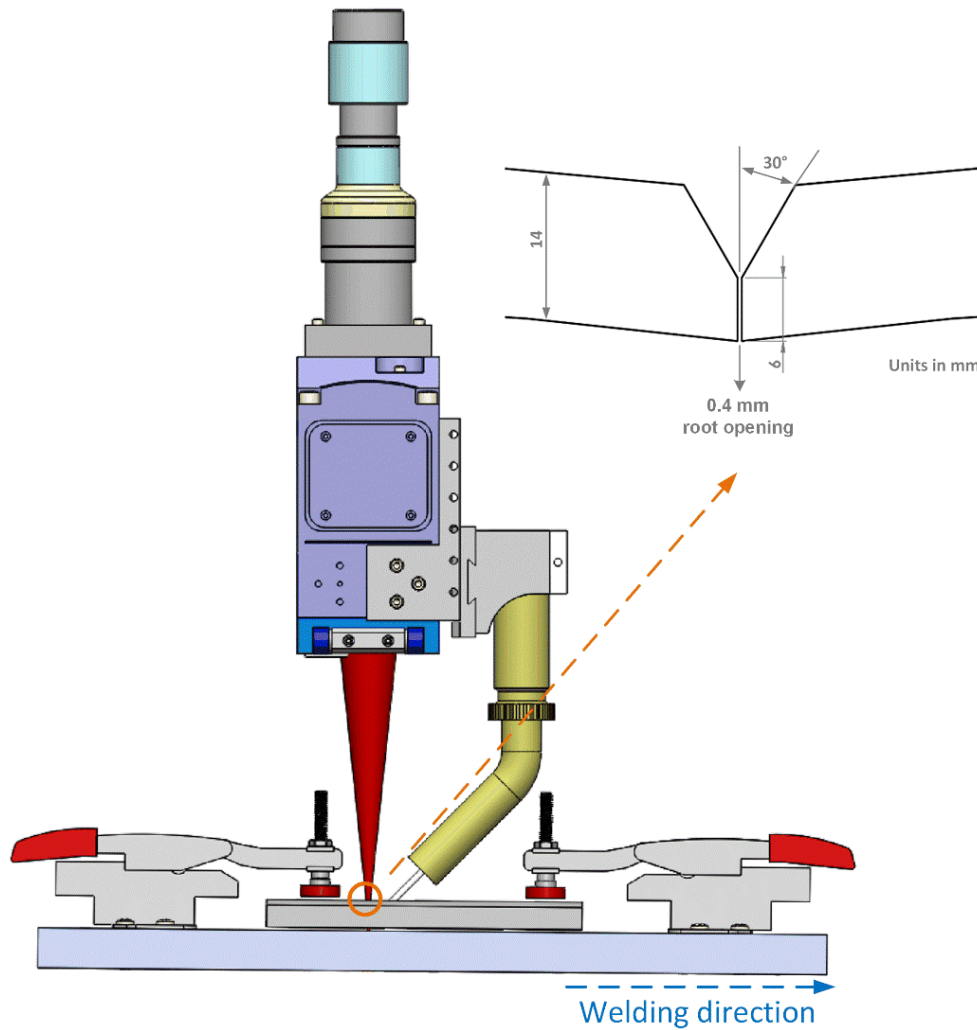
A typical experimental set-up for laser welding process
